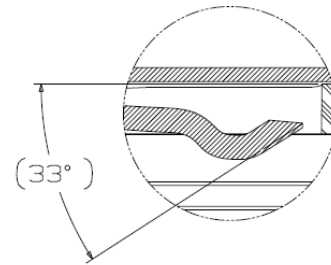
[USB 2.0](#) Type-C Plug Interface Dimensions, cont.
